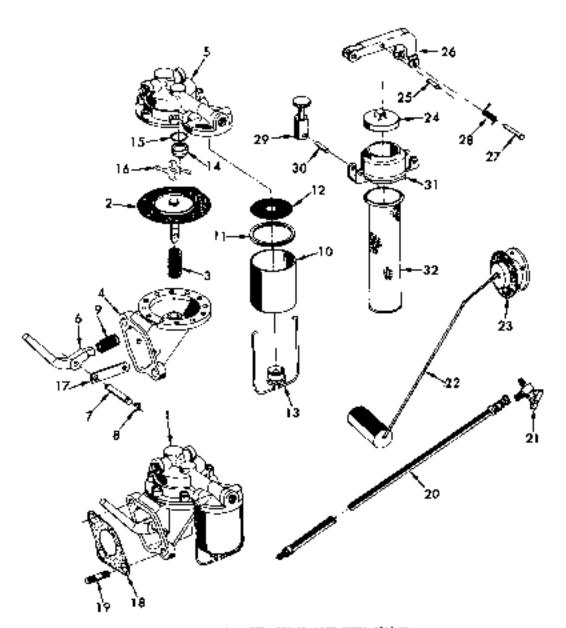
FUEL PUMP AND FUEL FILLER
